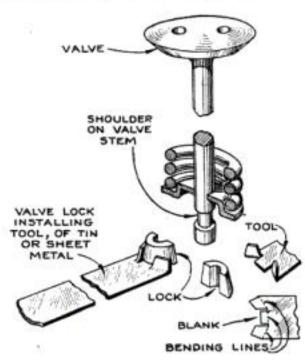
A valve lock installing tool that is casy to make and will save much wear and tear.
